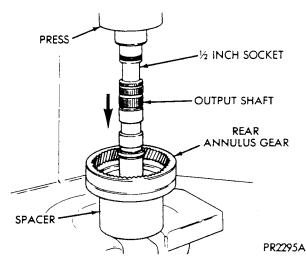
Install Output Shaft into Rear Planetary Annulus Gear
